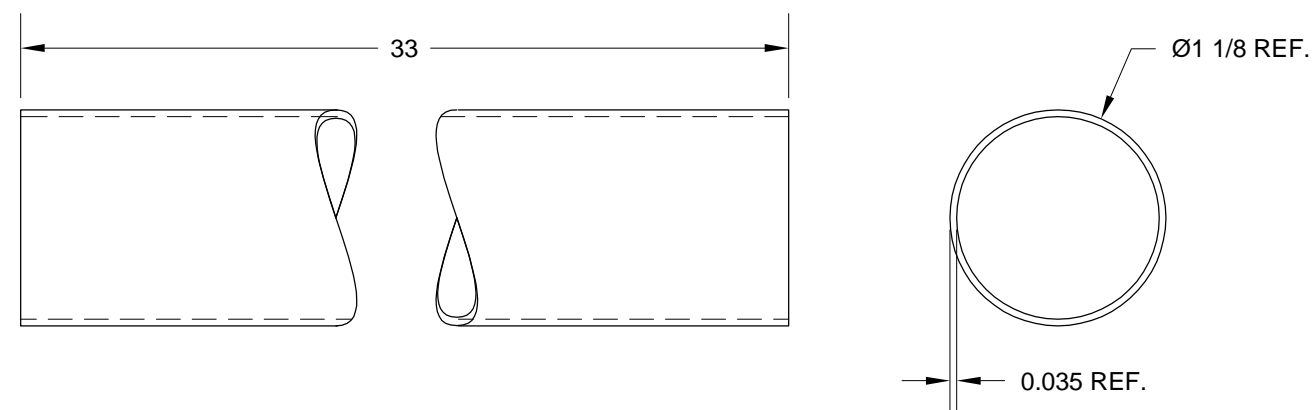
ELEVATOR PUSHROD (FWD) FABRICATION
